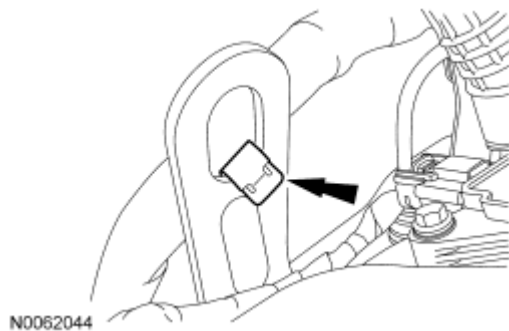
Locating PSP Hose Retainer From Engine Lifting Eye
